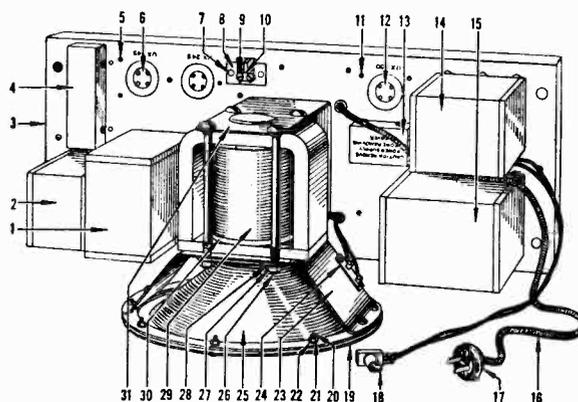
Top View of Amplifier-Speaker Unit, showing parts.
